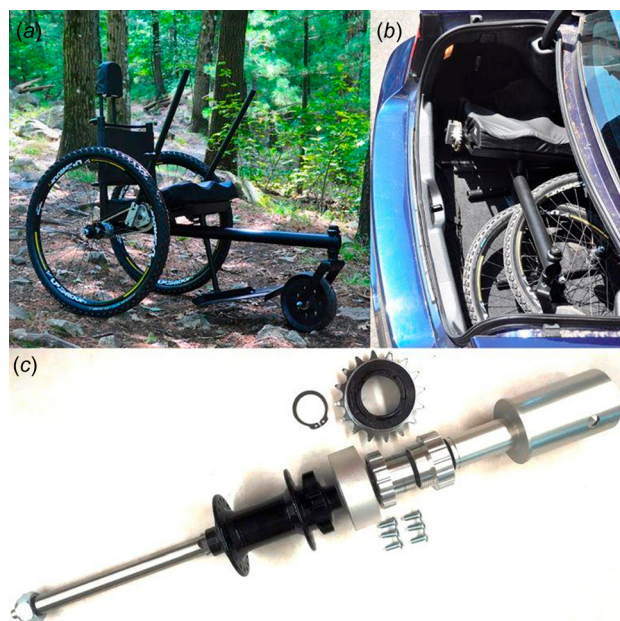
The GFC. (a) GFC prototype in profile. (b) GFC prototype disassembled for transport in the trunk of a sedan. (c) Exploded view of the quick-release wheel mechanism, which enables the rear wheels to be removed using one hand. When the wheels are removed, the drivetrain remains attached to the frame of the chair. The moving parts, freewheel, and coupling utilize standard bicycle parts.
